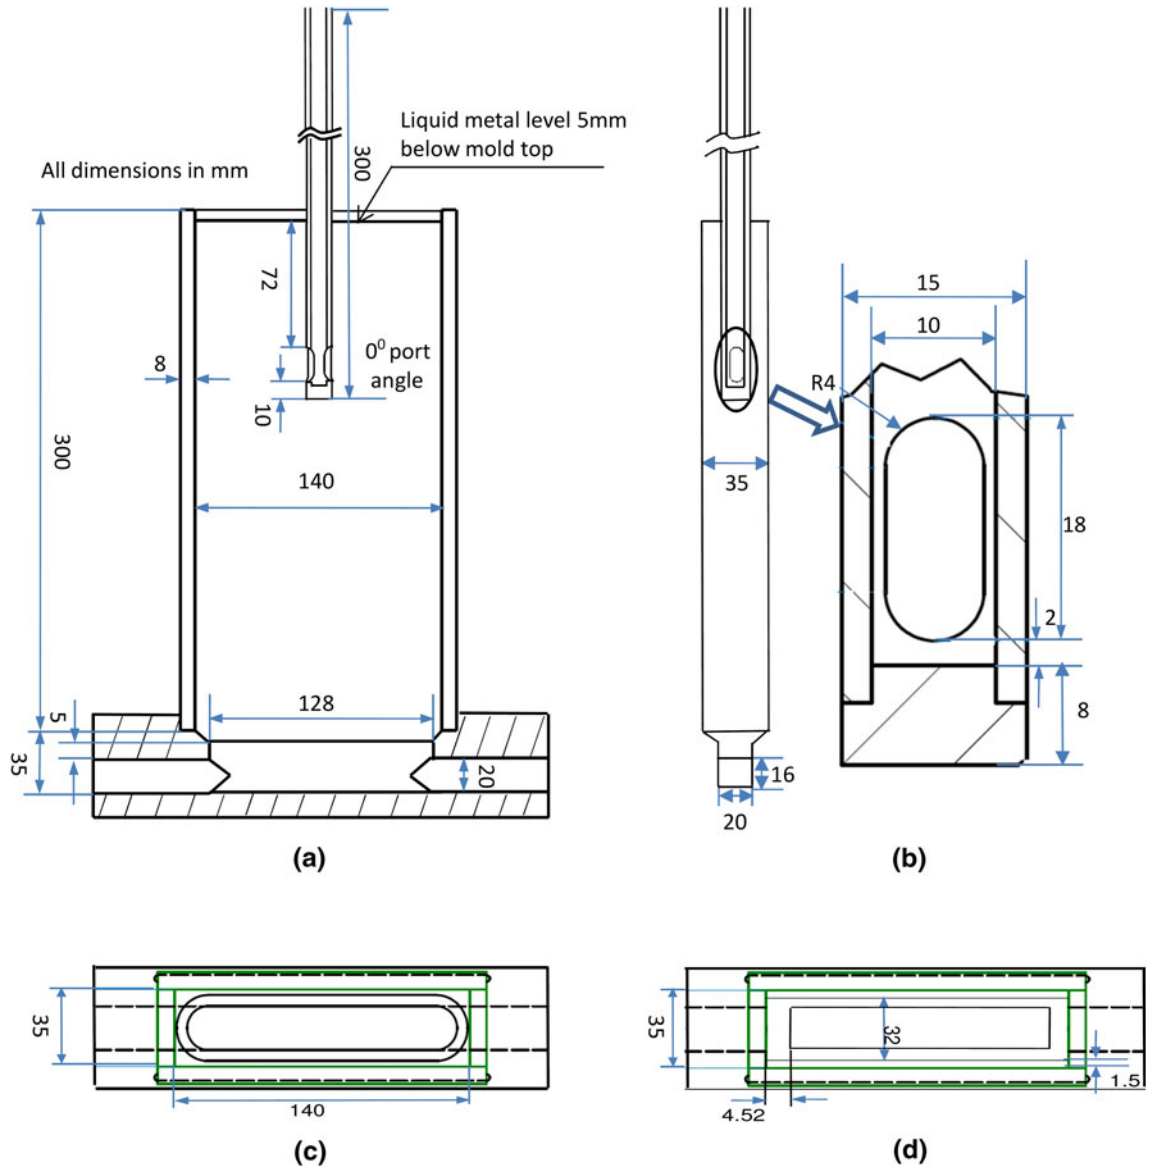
Geometry of GaInSn model of continuous casting<sup>[17–19]</sup> in mm. (a) Front view of the nozzle and mold apparatus, (b) side view of the model domain with approximated bottom, (c) bottom view of the apparatus, and (d) bottom view showing approximation of circular outlets with equal-area rectangles.
